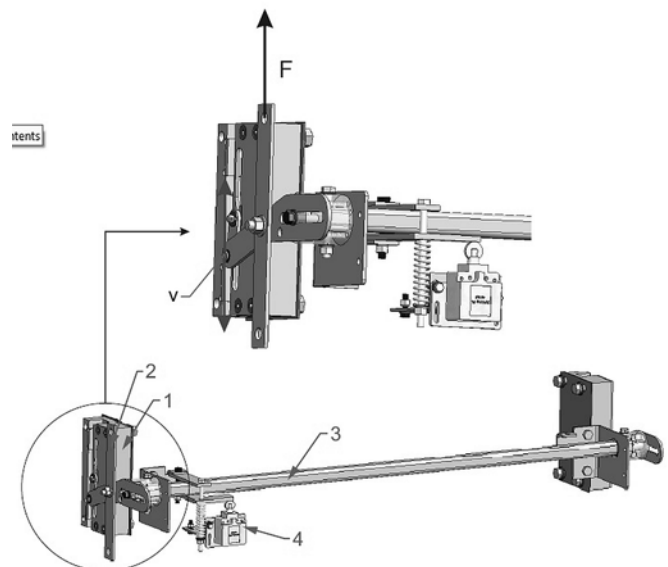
Kinematic scheme of the friction drive lift braking system. 1 – a gear, 2 – a release lever, 3 – the gears coupler, 4 – controlling and compensating system
